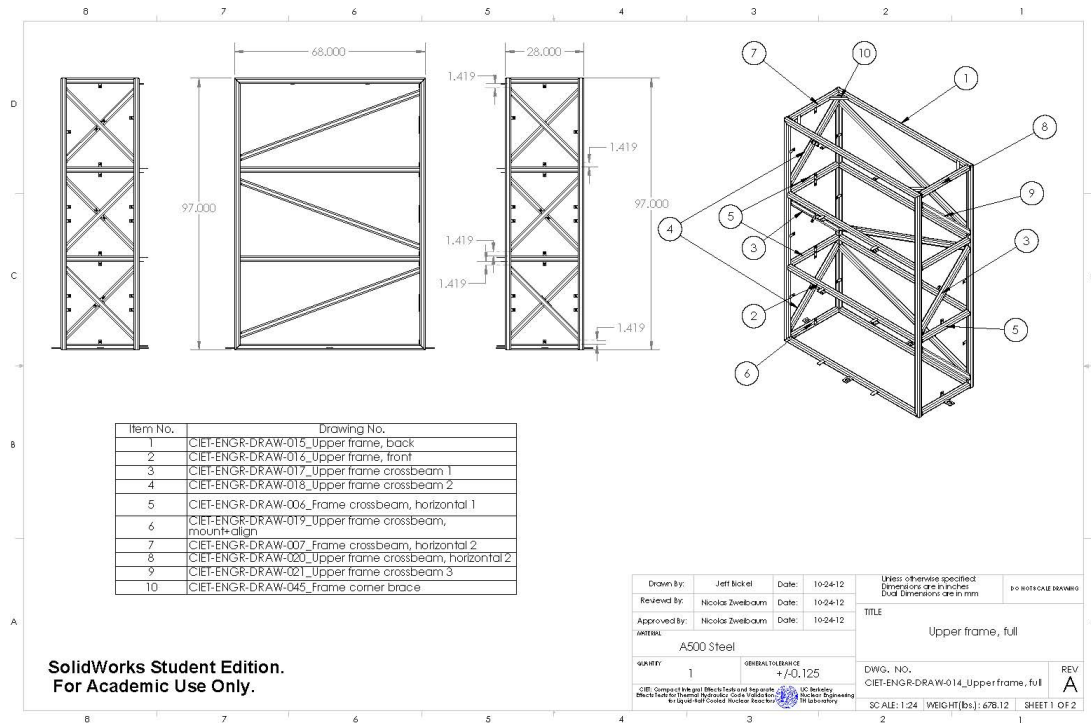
Engineering drawing of the CIET 1.0 upper frame.
